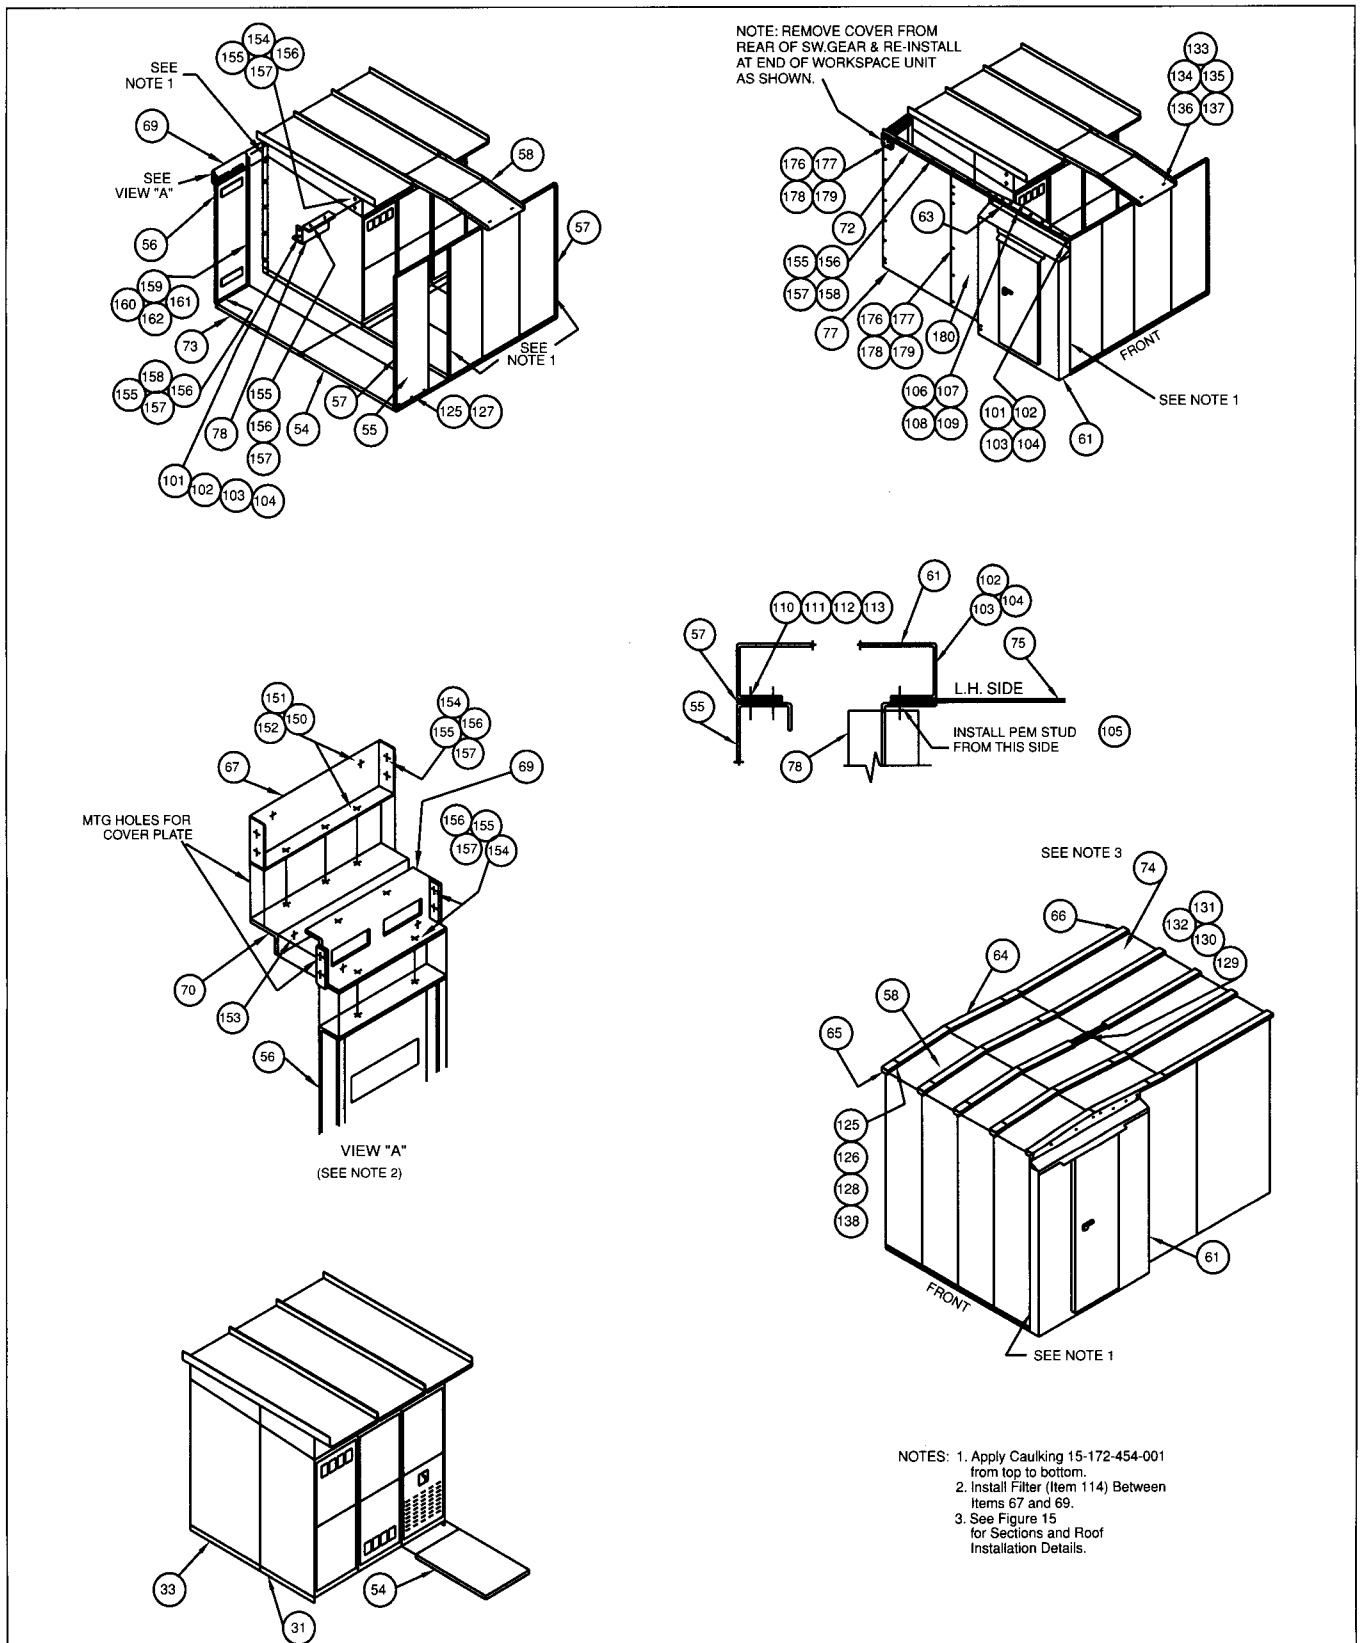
Single Aisle (SGM) with Work Space Field Assembly
